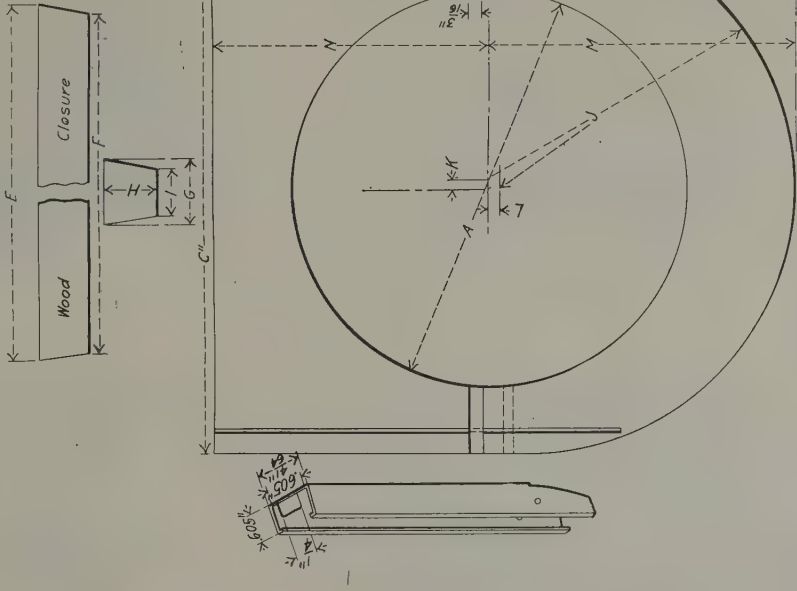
Master Drawing of National H-4 Dust Guard Shown in Fig. 1034.
